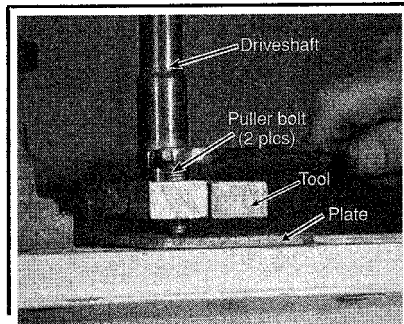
If removal is difficult, use a 2-piece puller to free the driveshaft
